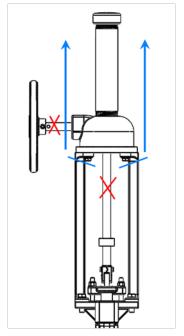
Knife Gate Valve with Bevel Gear Actuator, Vertical Lifting
